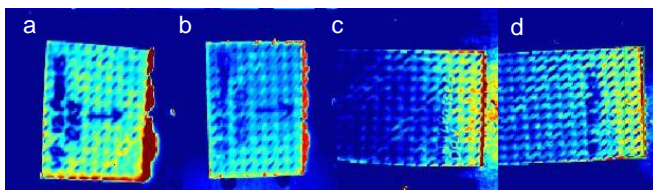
Flash thermography images of the set of coupons machined with tool wear incurred at 8.4m (a) UD and dry; (b) UD and cryogenic; (c) MT and dry; (d) MT and cryogenic.
